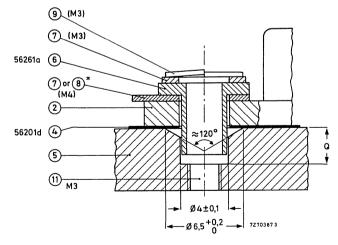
Assembly (partial) for Fig. 10 - tapped holes. Q minimum 2,5 mm.
